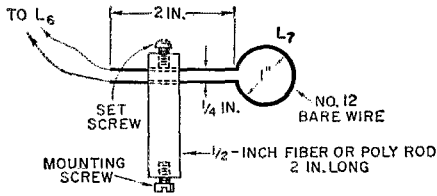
Coupling link L_7 is made adjustable by mounting through an insulating rod as shown. The set screw locks the coil in the desired position.
